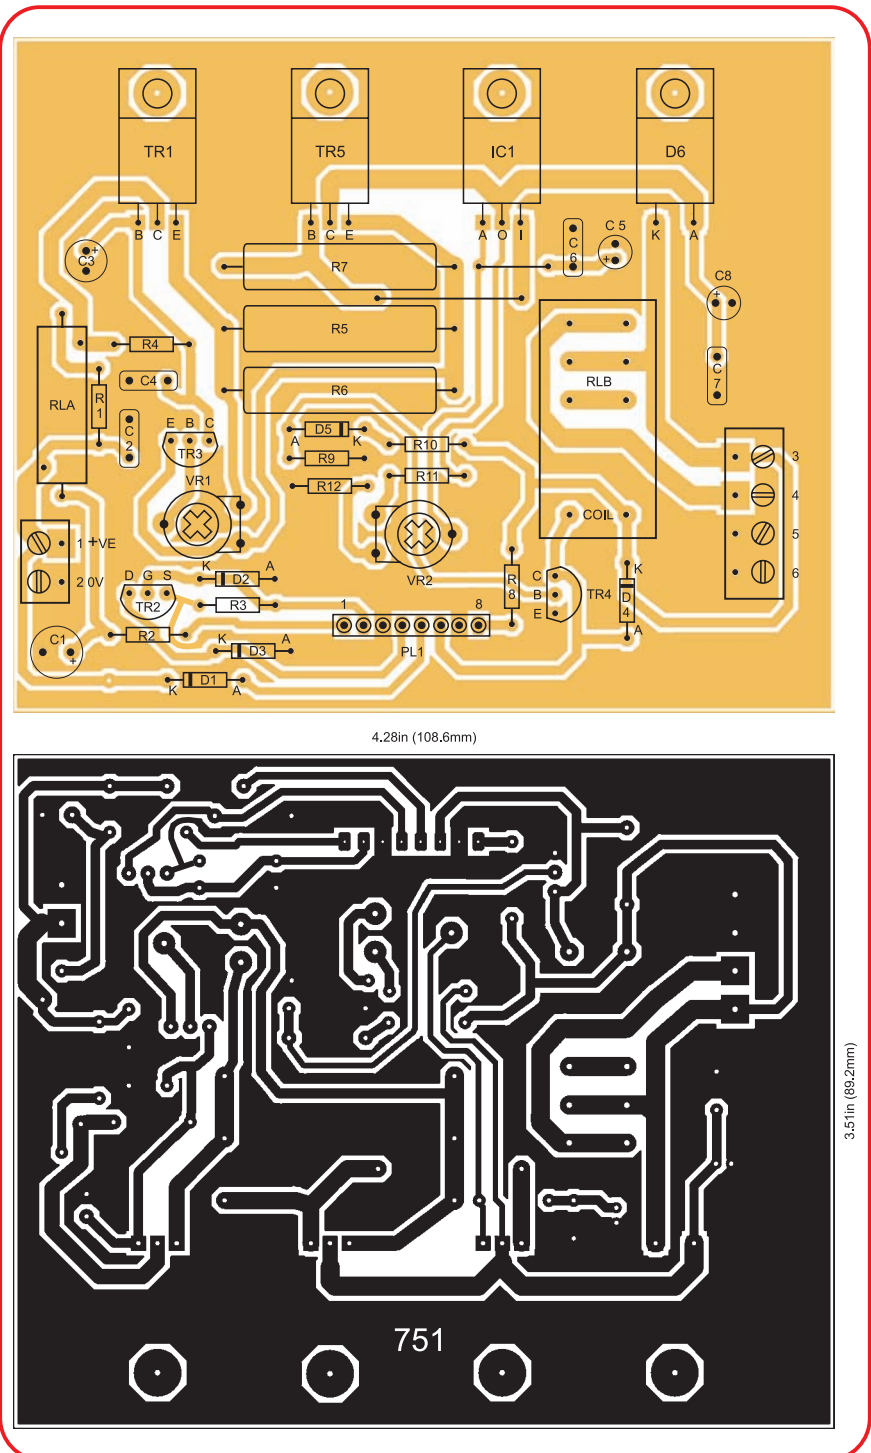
Printed circuit board component layout and full-size copper foil master. The L-shaped aluminium heatsink/mounting bracket is not shown here – see photos
